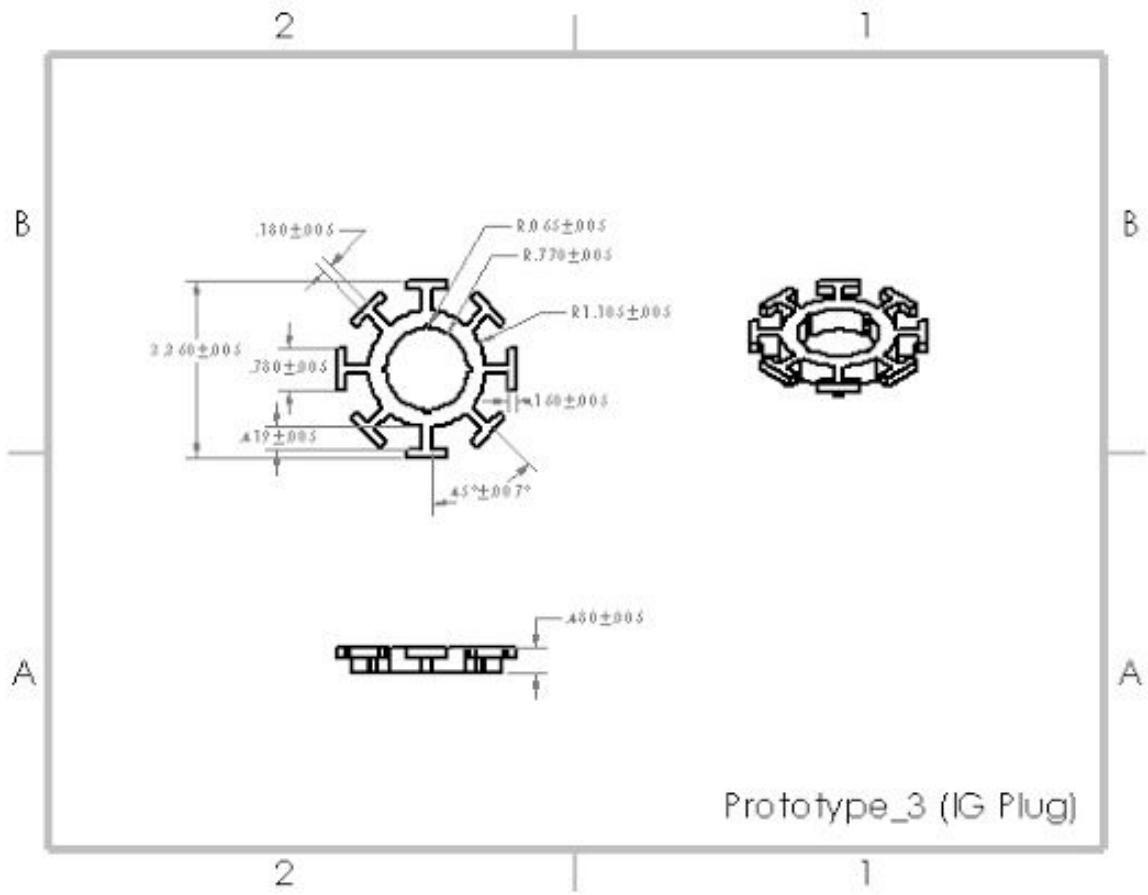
Solidworks 2D Prototype Independent Gear Plug
